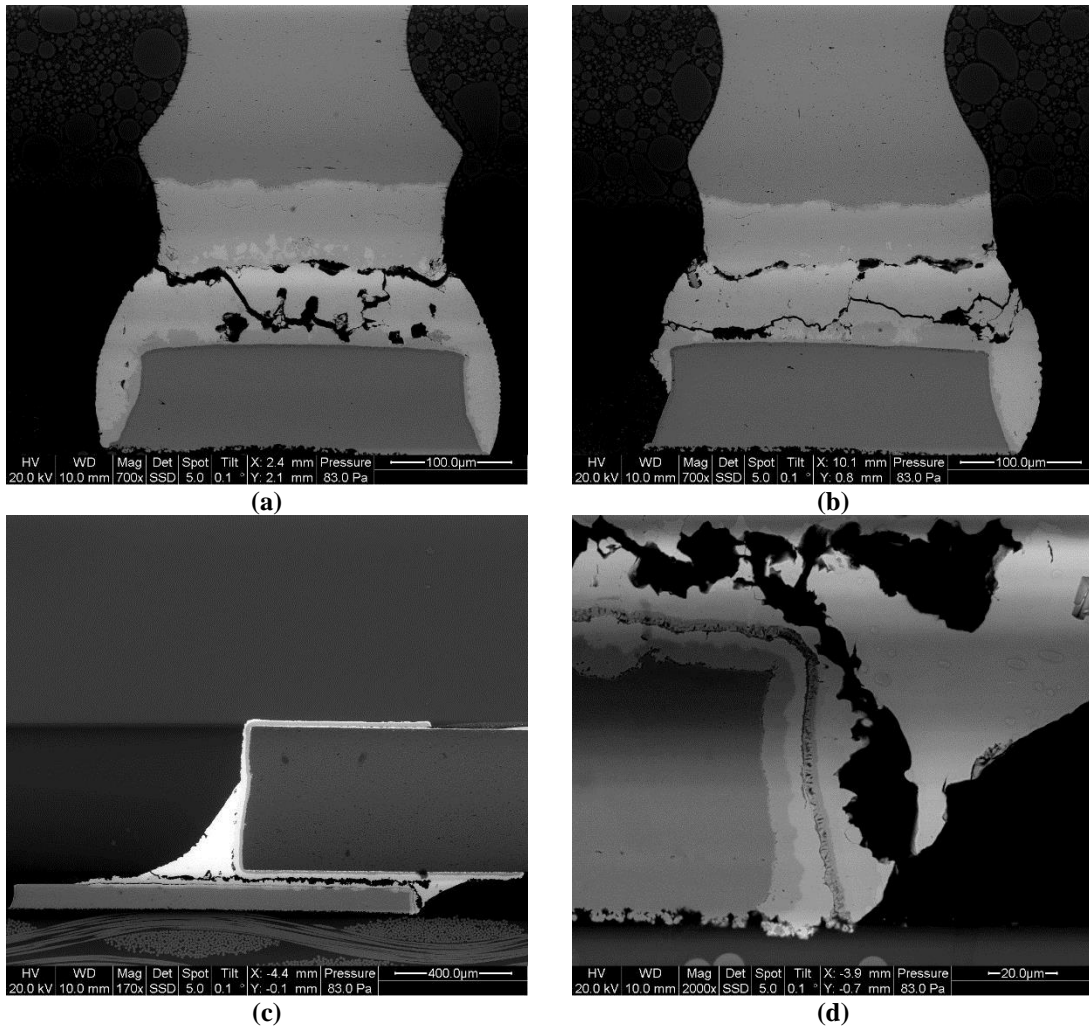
SAC305+0.13%Ce Solder Failure during Mechanical Shock Test (a) QFN44 – 1000 hours/200°C Aging (b) Additional QFN44 - 1000 hours/200°C Aging (c) R2512 - 1000 hours/200°C Aging (d) Magnified view of R2512 Crack
